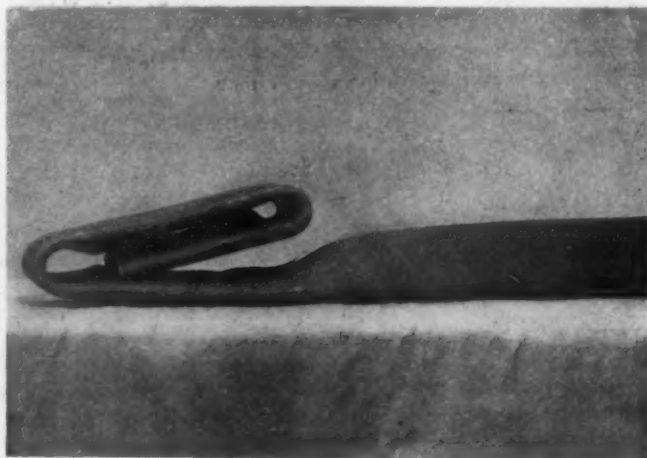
C-46-O Krupp chassis frame steel deformed to show extent of bending without showing cracks. Under a compression test this steel showed set when subjected to 85,206 pounds per square inch.
